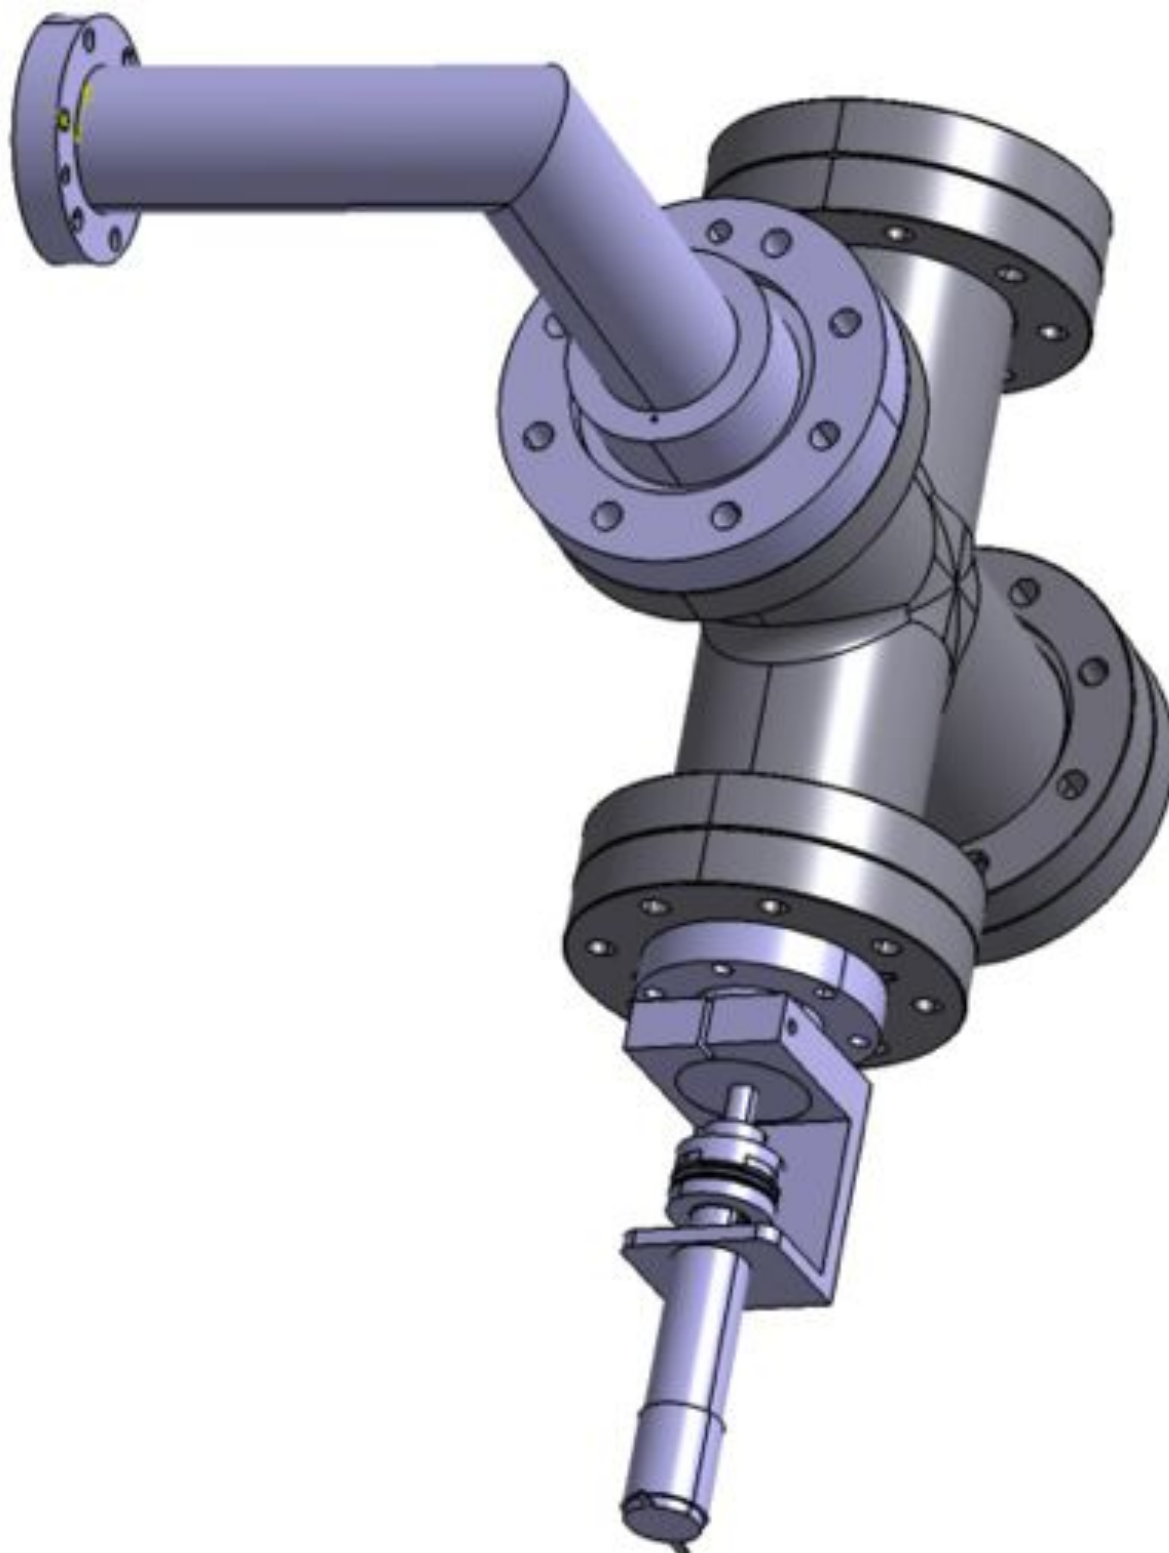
3D of the final calibration system. Drawing provided by Kurt Bösiger, UZH.
